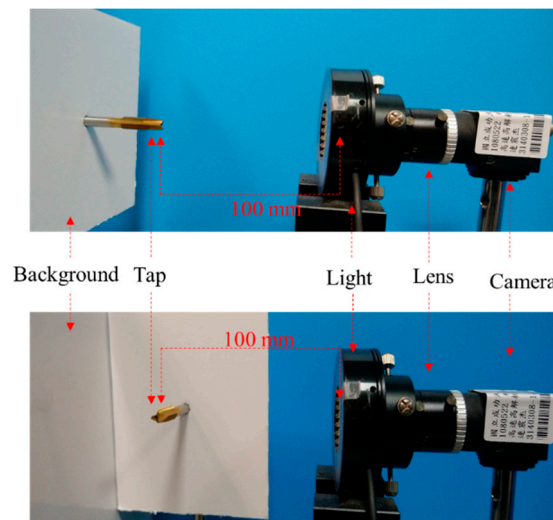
Experimental environment for tap inspection; a) Frontal view; b) Side view.
